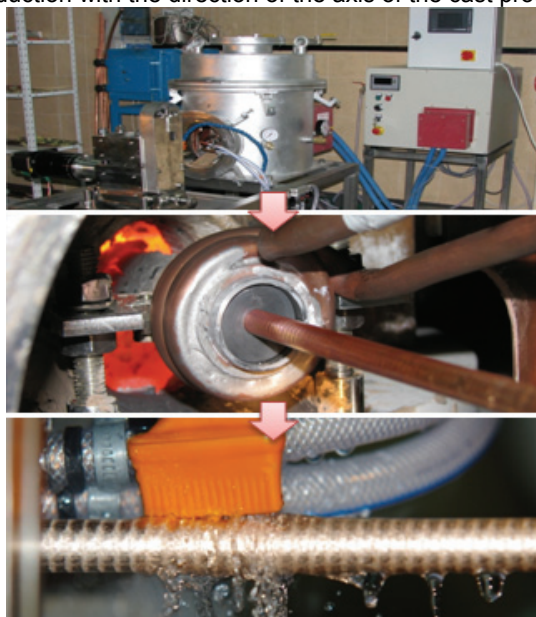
Vacuum induction melting and casting furnace – own design DCC-AGH® [13]
